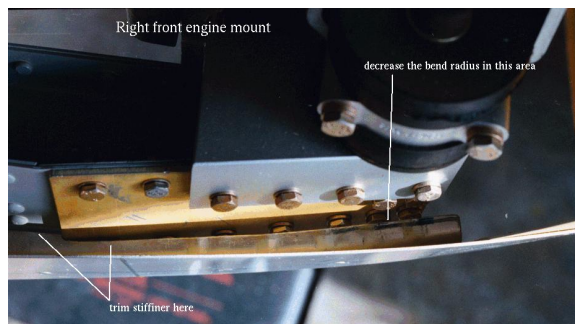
This view of the right lower engine mount arm shows how the stiffener on the lower cowl stringer must be trimmed to eliminate interference with the mount.
